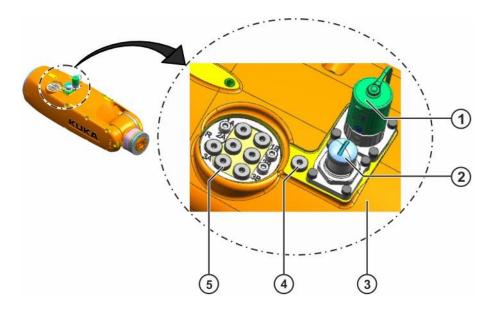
KUKA KR6 Robot arm mounted interfaces
